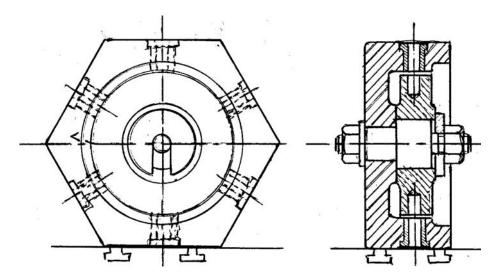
Jig for drilling six equispaced radial blind holes in a disc.
